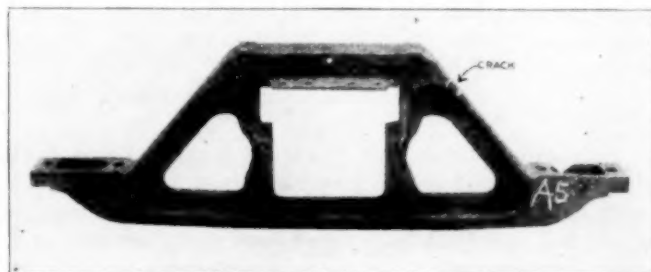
SIDE FRAME BEFORE WELDING
